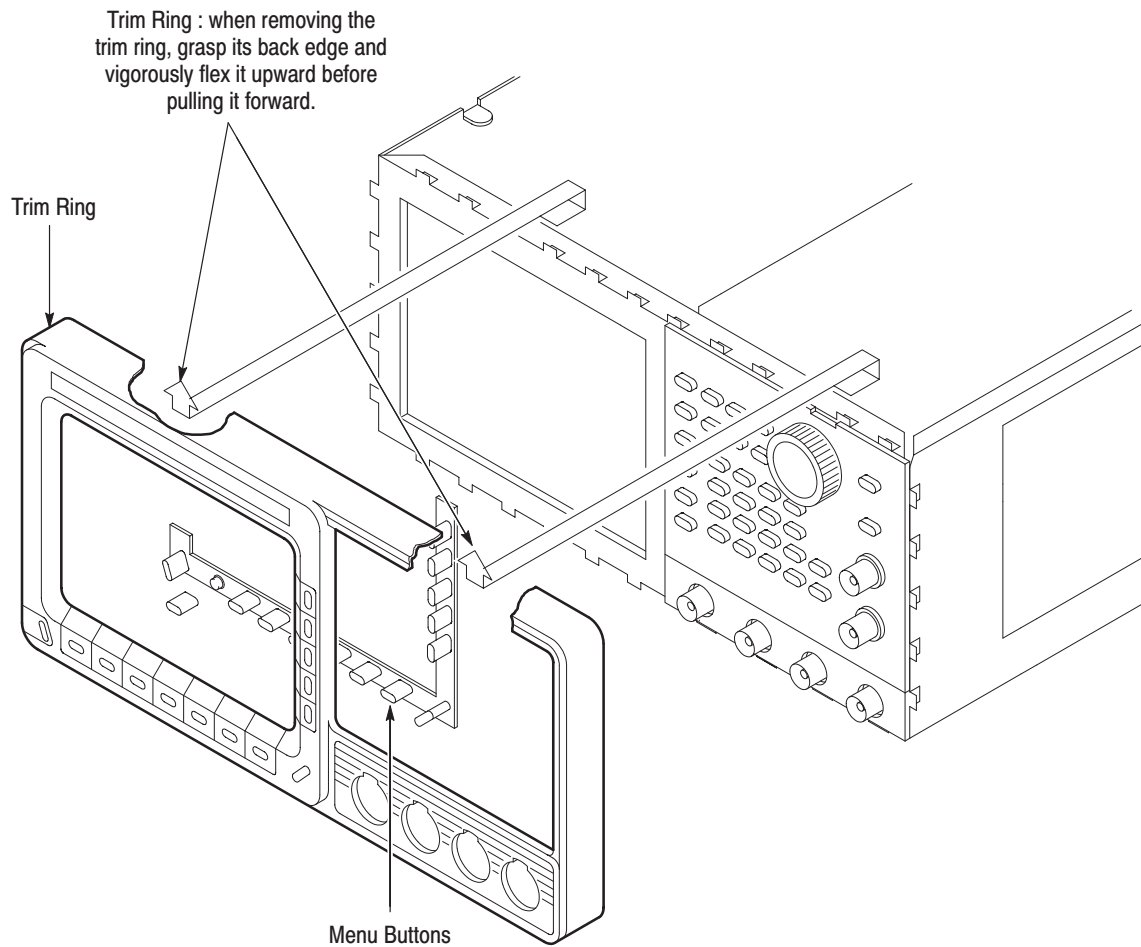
Front cover, trim ring, and menu button removal (front cover not shown)
